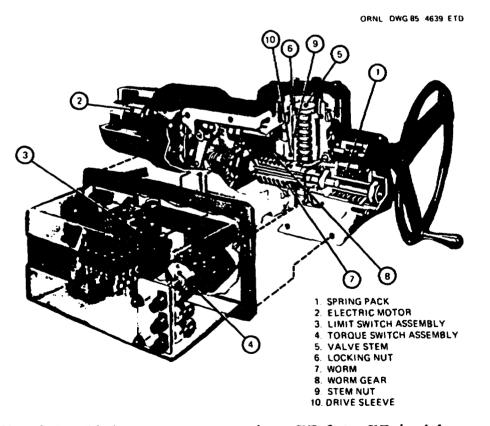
Limitorque operator sizes SMB-0 to SMB-4 with some parts identified.
